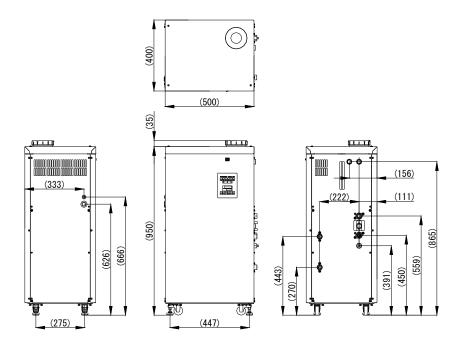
Outline Dimensions (fig.HRGC001-W and HRGC002-W)
